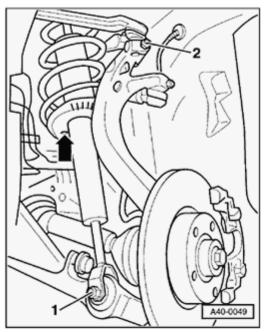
Inserting Both Upper Link Joint Pins In Wheel Bearing Housing And Bend Downward As Much As Possible Using Pliers T40067
